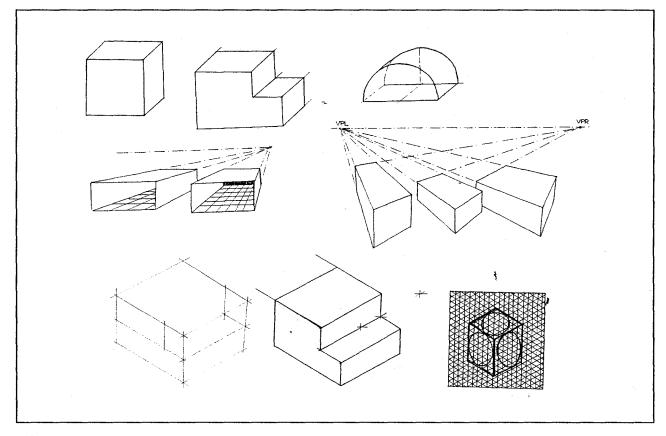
Oblique drawing, perspective drawing and isometric drawing
